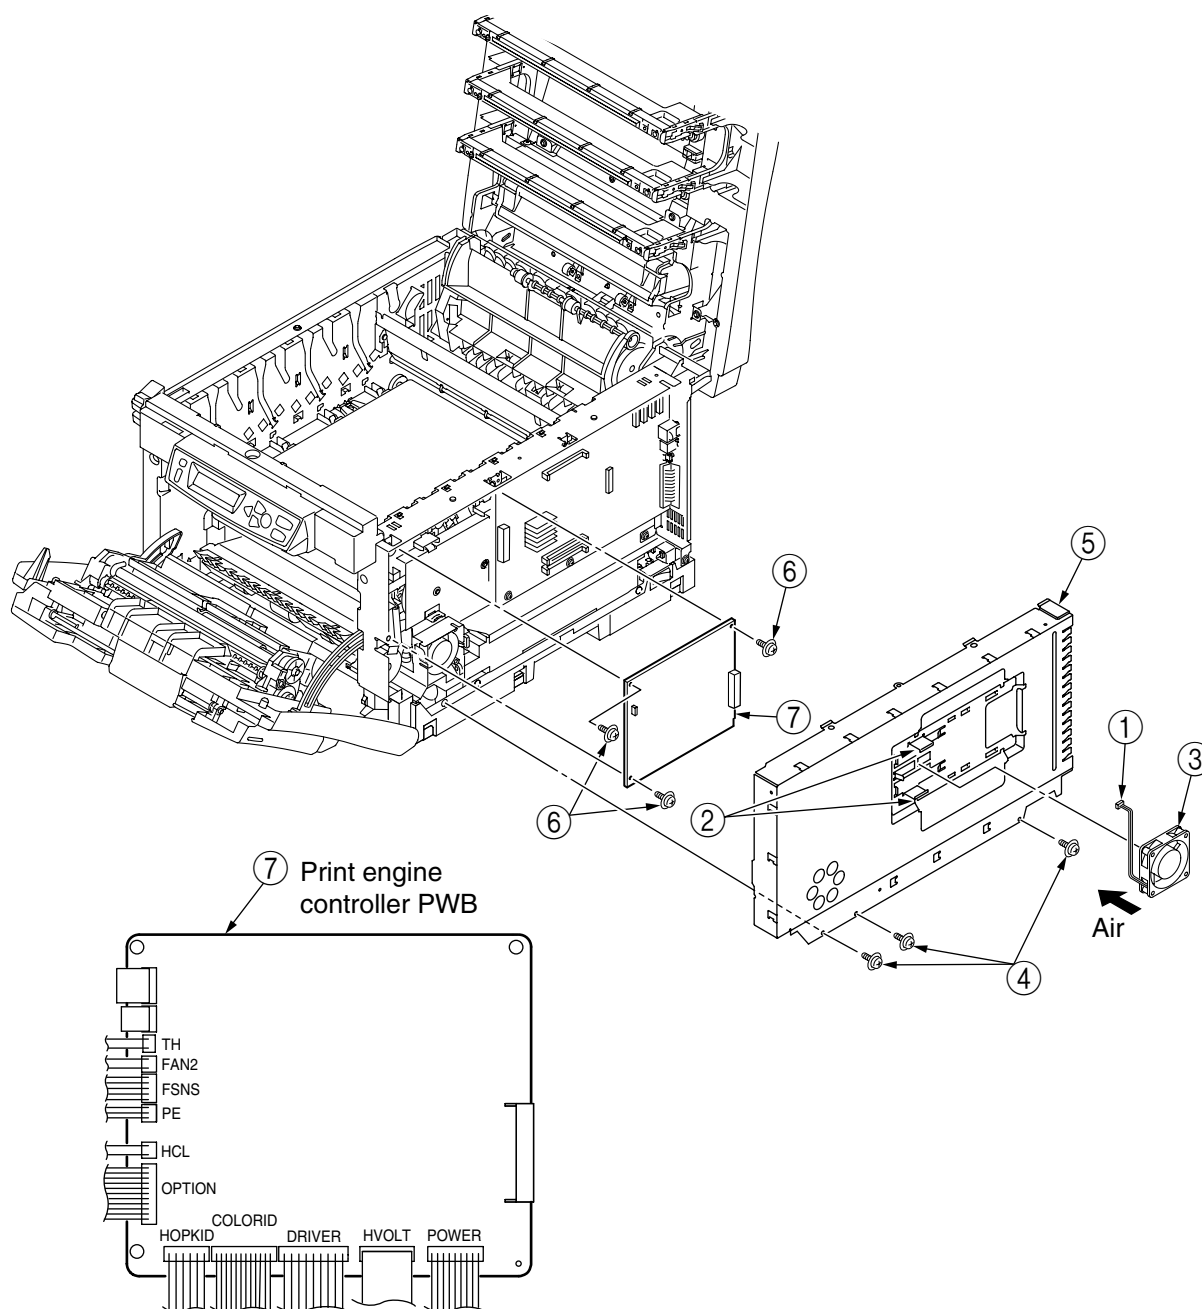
Print Engine Controller PWB (C5300)
